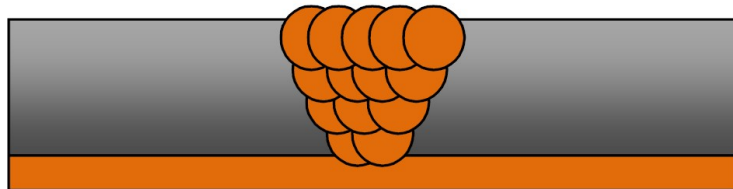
Opened hole filled by welding, chemical composition equivalent to internal clad/overlay
